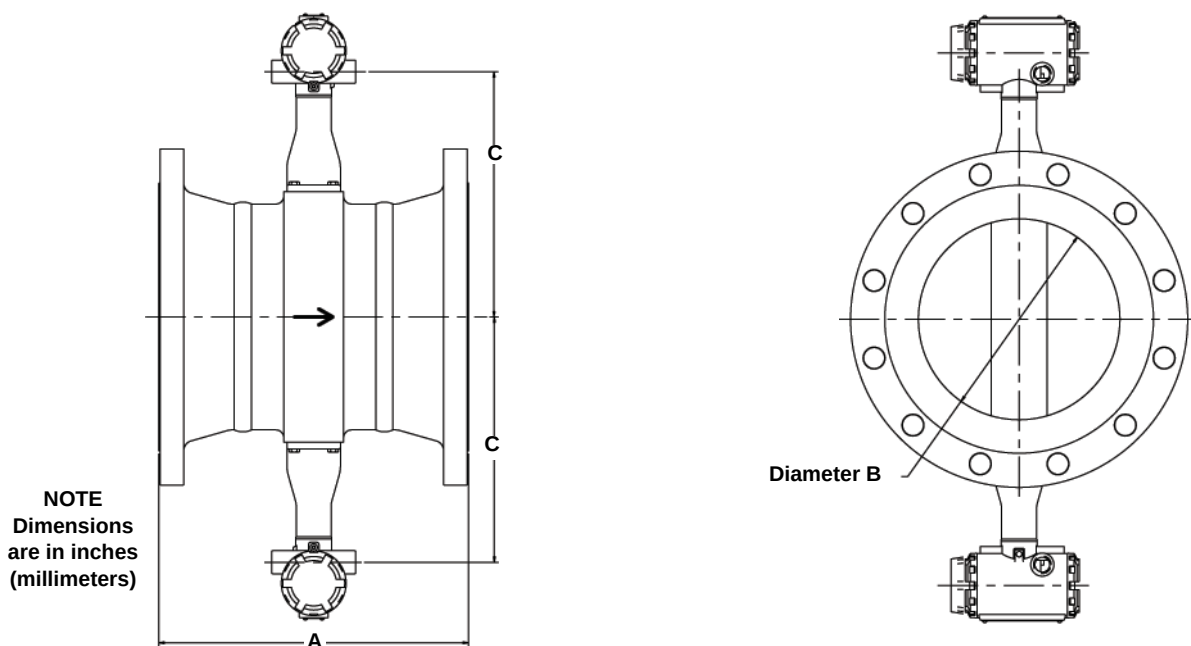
Vortex Dual-Sensor Style Flowmeter Dimensional Drawings (6-in. (150 mm) through 12-in. (300 mm) line sizes)
